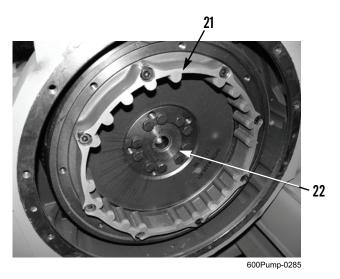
Outer Ring of Coupling and Pilot Bushing Assembly at Engine Flywheel Bore.
